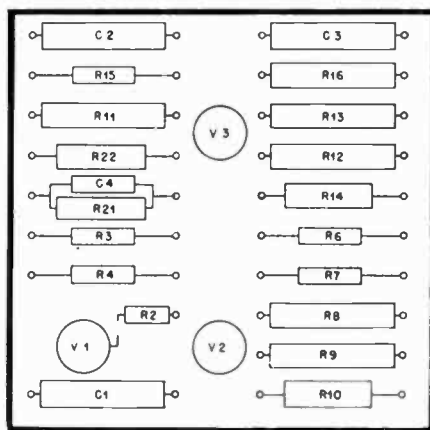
Arrangement of parts on terminal board shown in Fig. 2.
